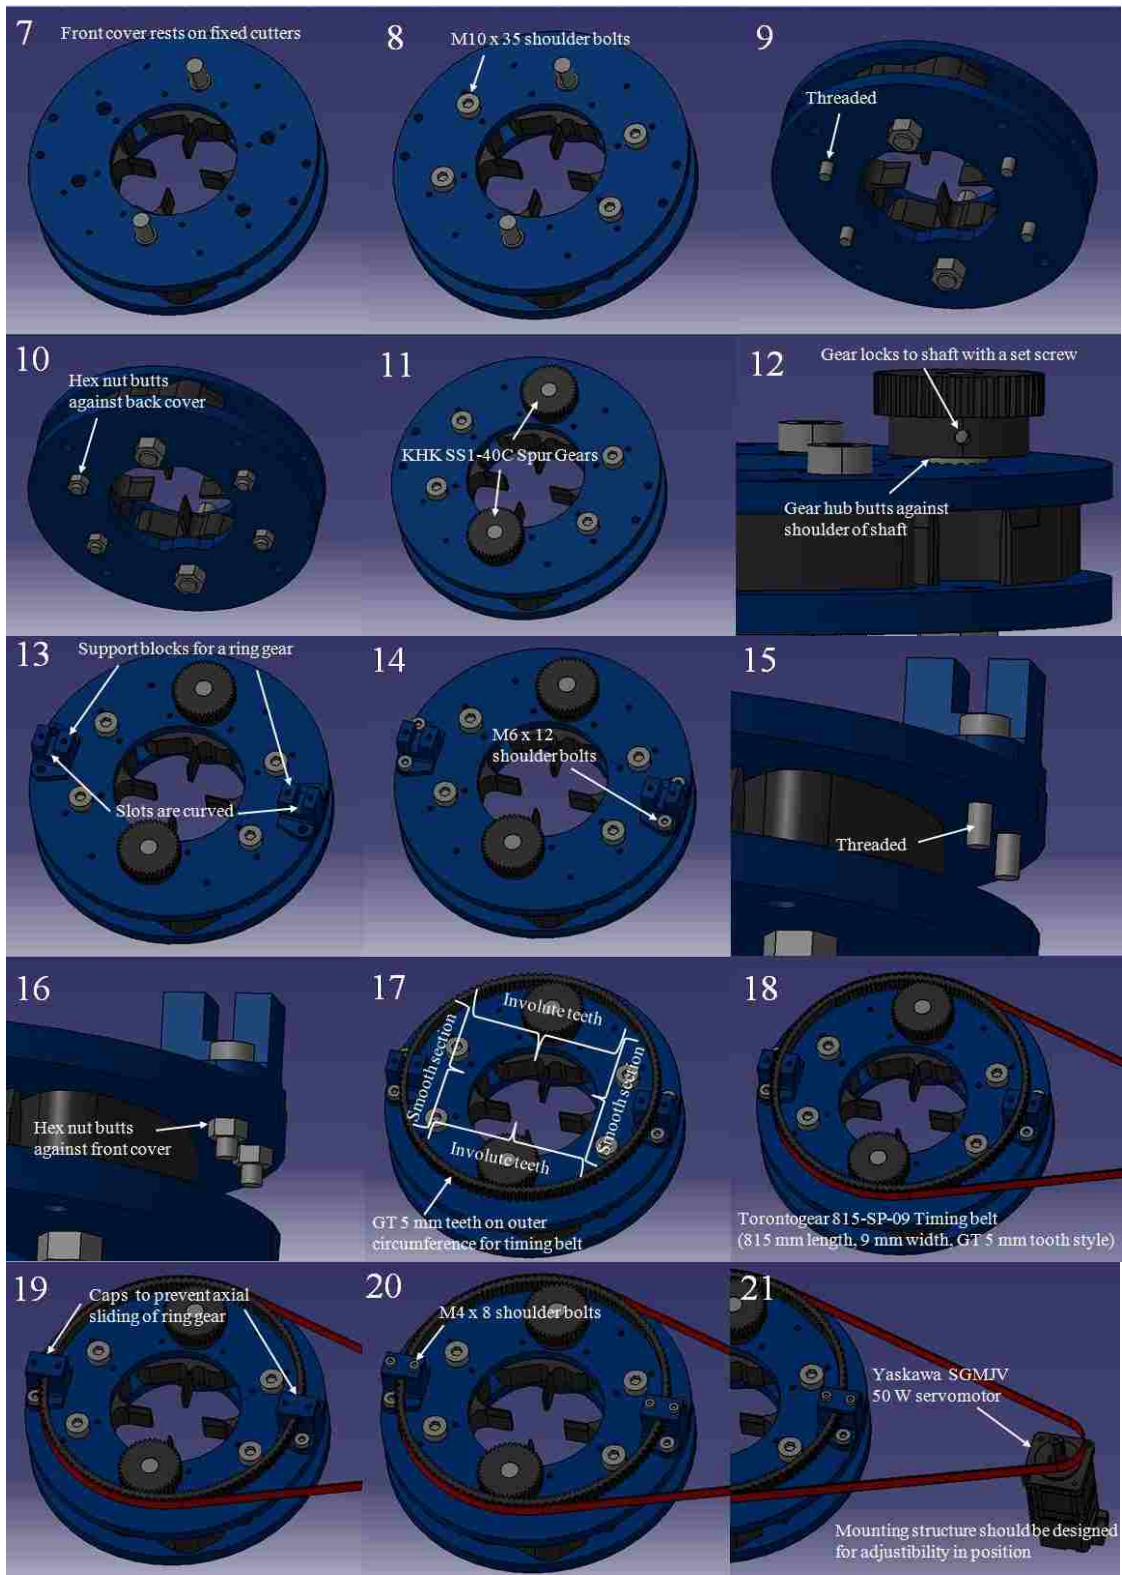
Step-by-step assembly of direct-drive adaptive cutter device (continued).
